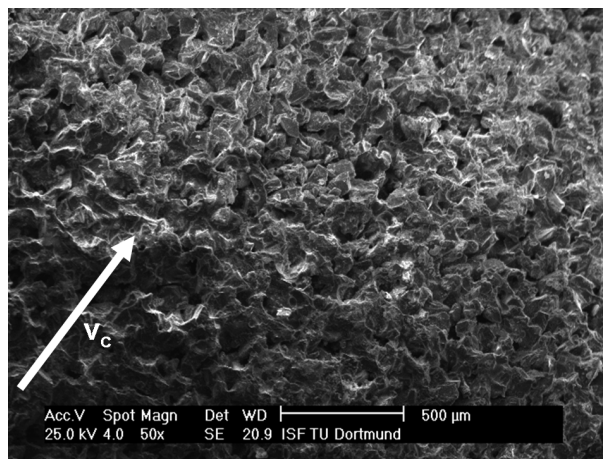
Grinding tool 1A1W-15-10-B91-V after dressing
